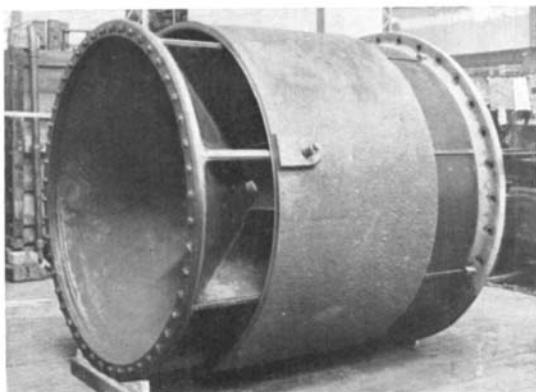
Shop Assembly of Cylindrical Balanced Relief Valve
